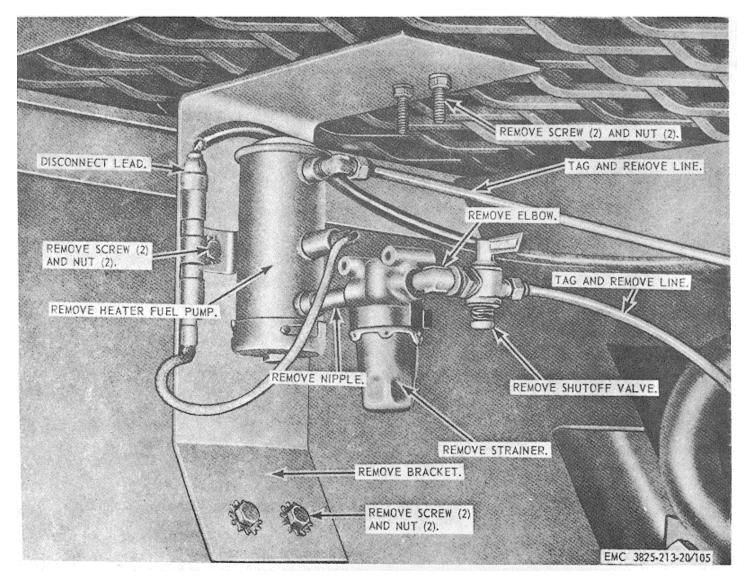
Plow and carrier engine heater fuel pump strainer, shut-off
